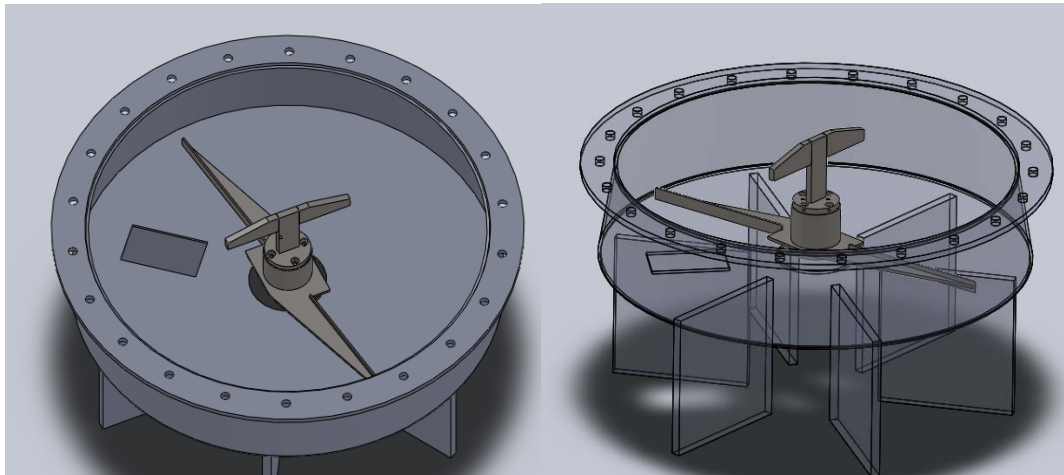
z-bottom scraper weldment axial mount in vessel
